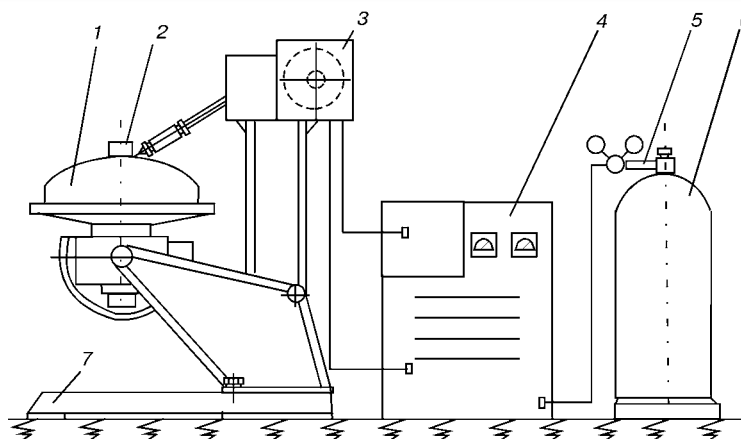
Schematic diagram of installation for welding pipe connection to bottom in shielding gas: 1 — bottom; 2 — pipe connection; 3 — wire feed mechanism; 4 — power source; 5 — gas pipeline; 6 — cylinder with gas; 7 — manipulator
